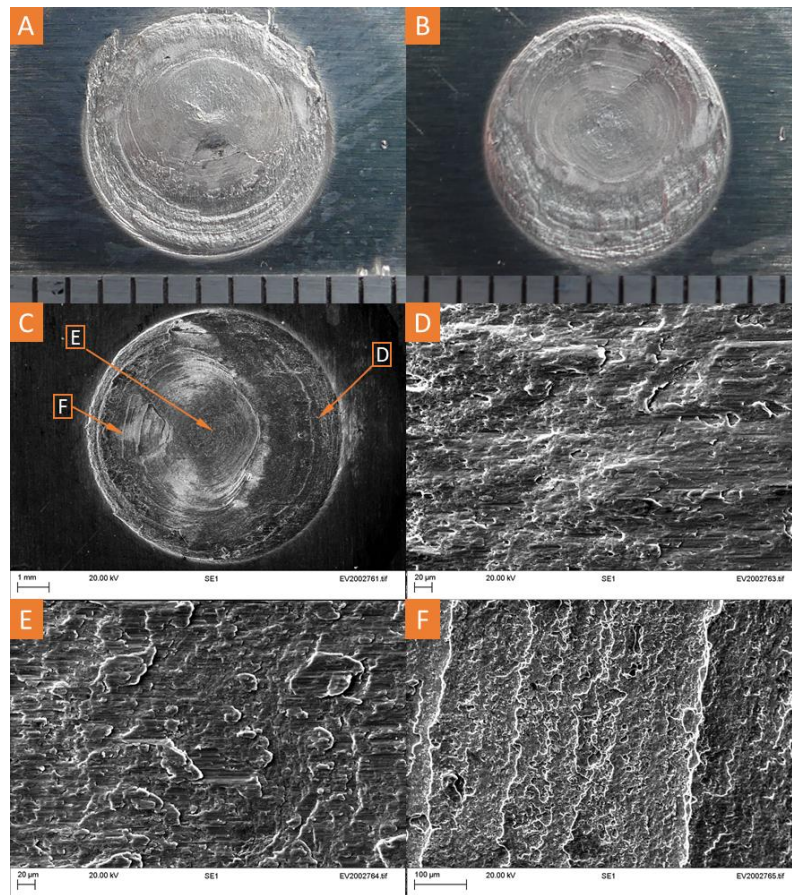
Fracture surfaces of RFSSW AA5754-H24 using Tool 2:
